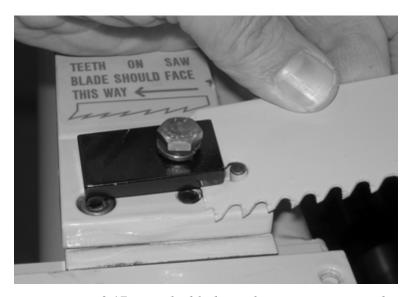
Put the blade on the mounting pin and tighten the nut to secure it under the fastening plate.
